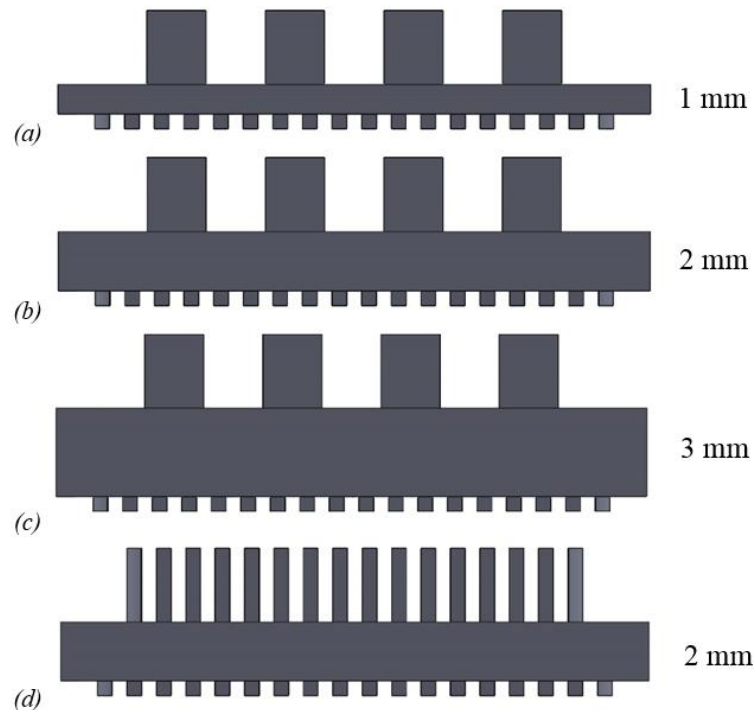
Front view of the mid layer in the test sections sent out for fabrication.
